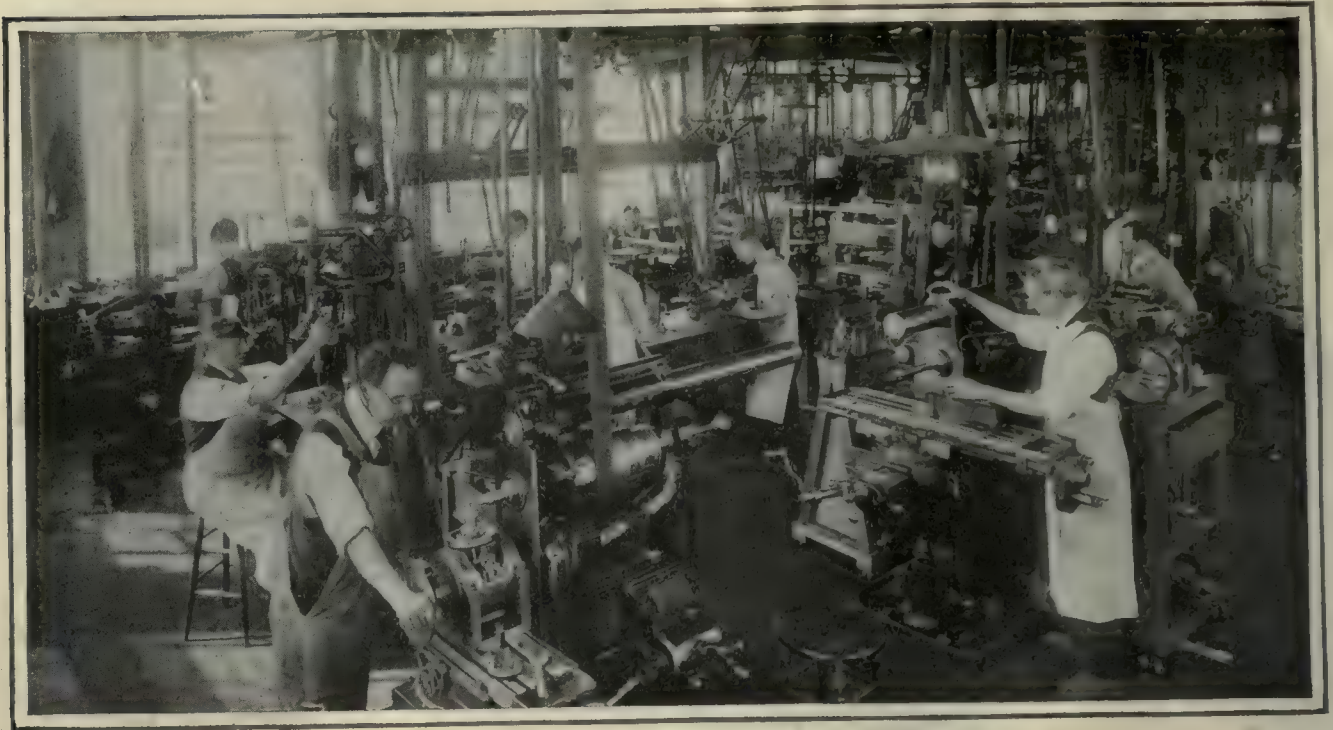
TOOLROOM SHOWING SPECIAL MILLING MACHINE WORK
